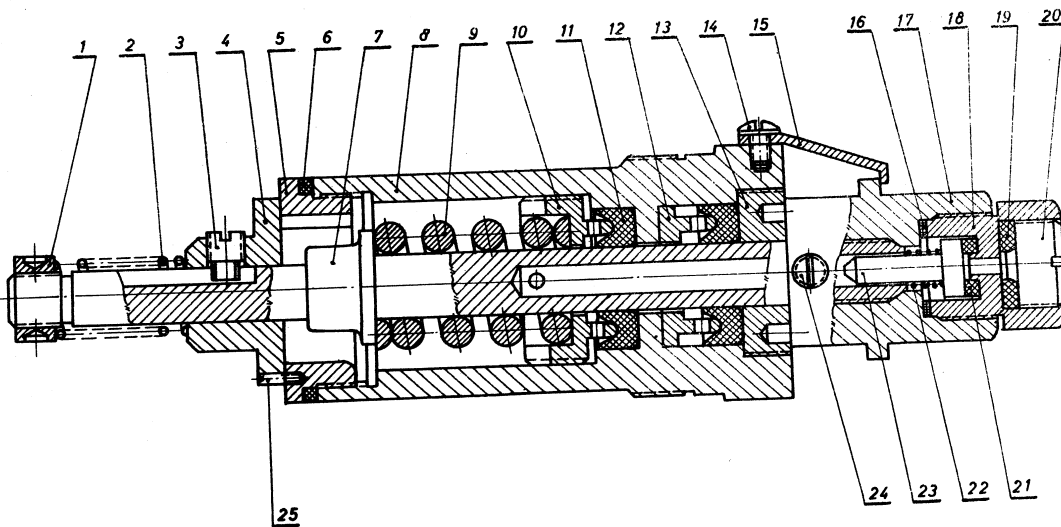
COUNTER RECOIL SPEED REGULATOR
